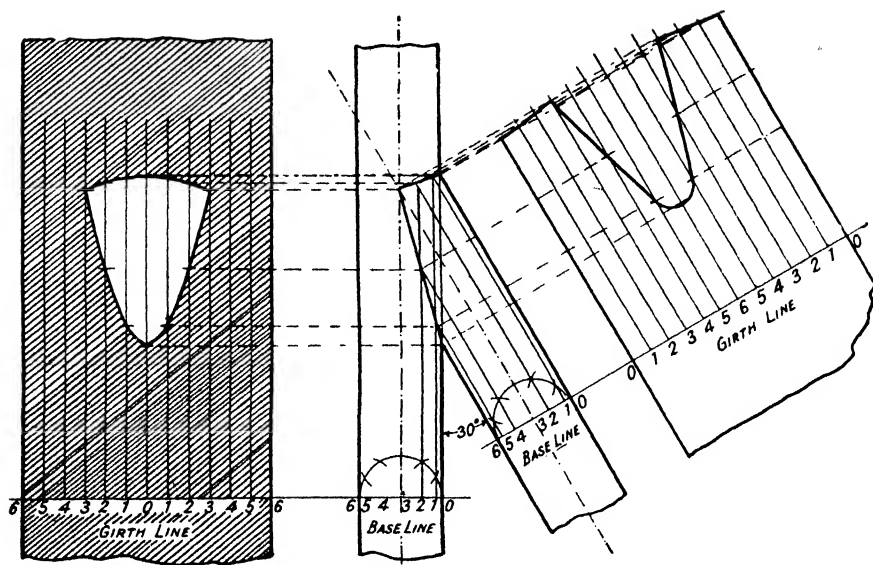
PATTERN FOR 30° BRANCH PIPE, BOTH PIPES BEING THE SAME SIZE
